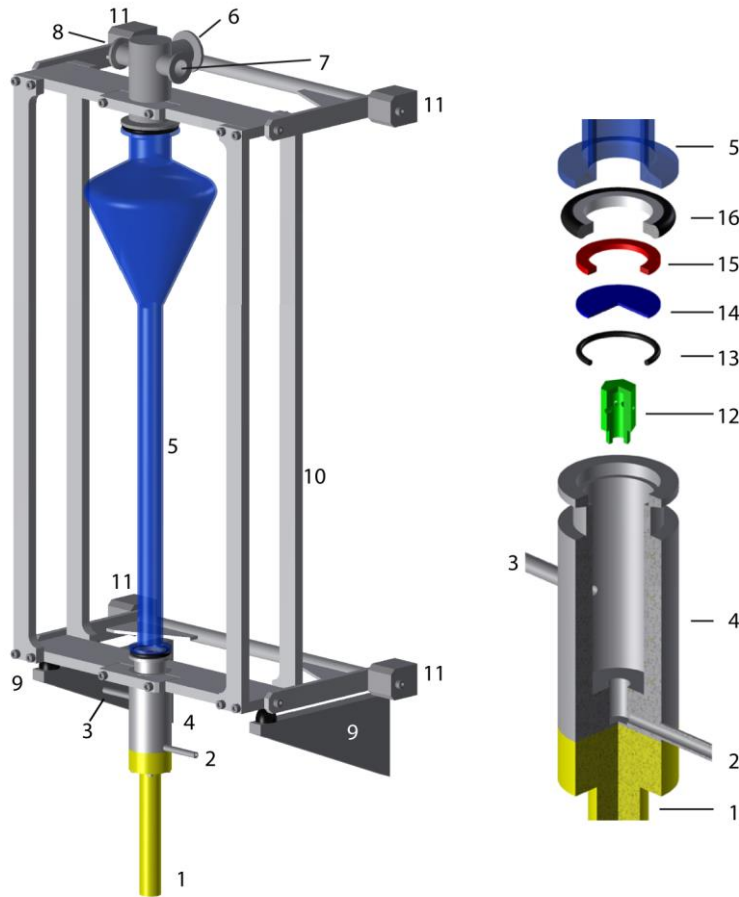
Assembly drawing the reactor section and an exploded three quarter section view of the windbox assembly with the vibrator (1), the gas inlet (2), the pressure gauge connection (3), the windbox (4), the reactor tube (5), the gas exit (6), pressure gauge connection (7), soft start gas exit (8), support with rubber feet (9), pivoting rack (10), wall mounting of pivoting rack (11), gas injection nozzle with 6 holes (12), O-ring seal (13), distributer plate (14), washer ring (15), and KF25 seal (16).
